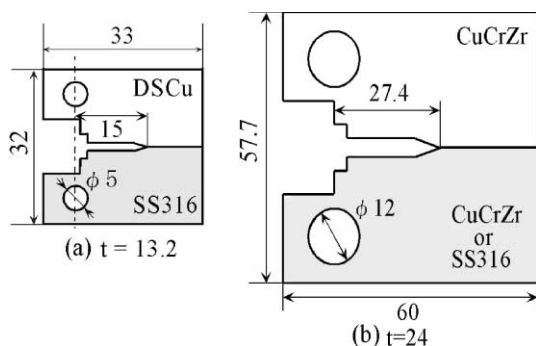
Dimensions of test specimens of fracture toughness test: (a) DS-Cu and DS-Cu/SS316 (b) HIP heat treated and non-heat treated CuCrZr, CuCrZr/CuCrZr and CuCrZr/SS316.
